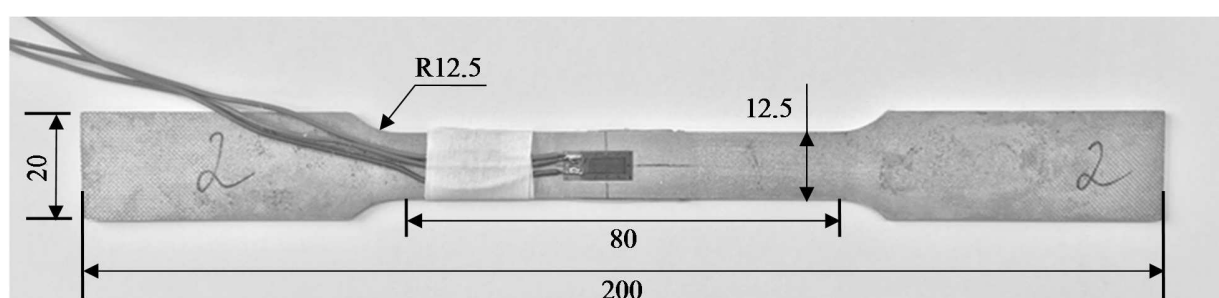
Tensile test specimen and strain gauge. Dimensions are given in mm.
